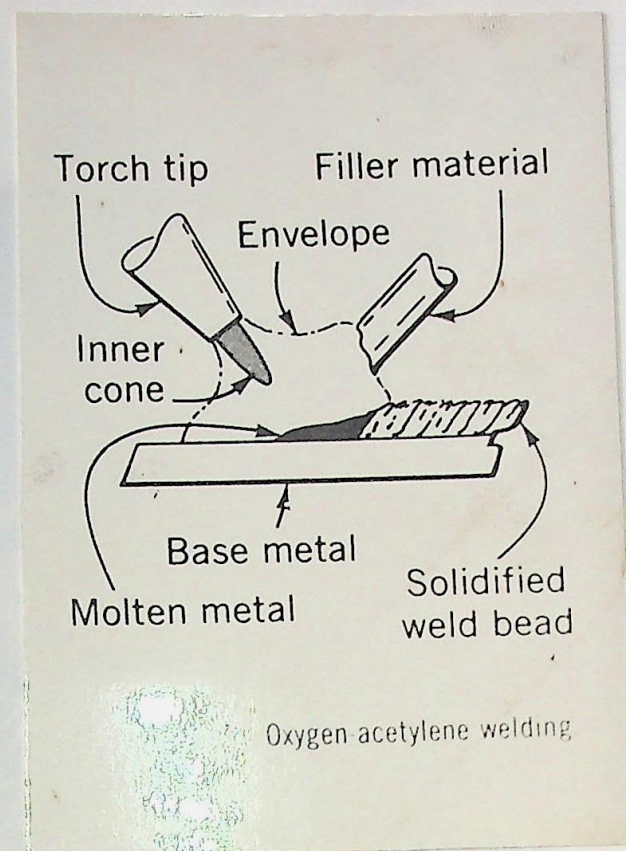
Schematic drawing of oxyacetylene welding process.
